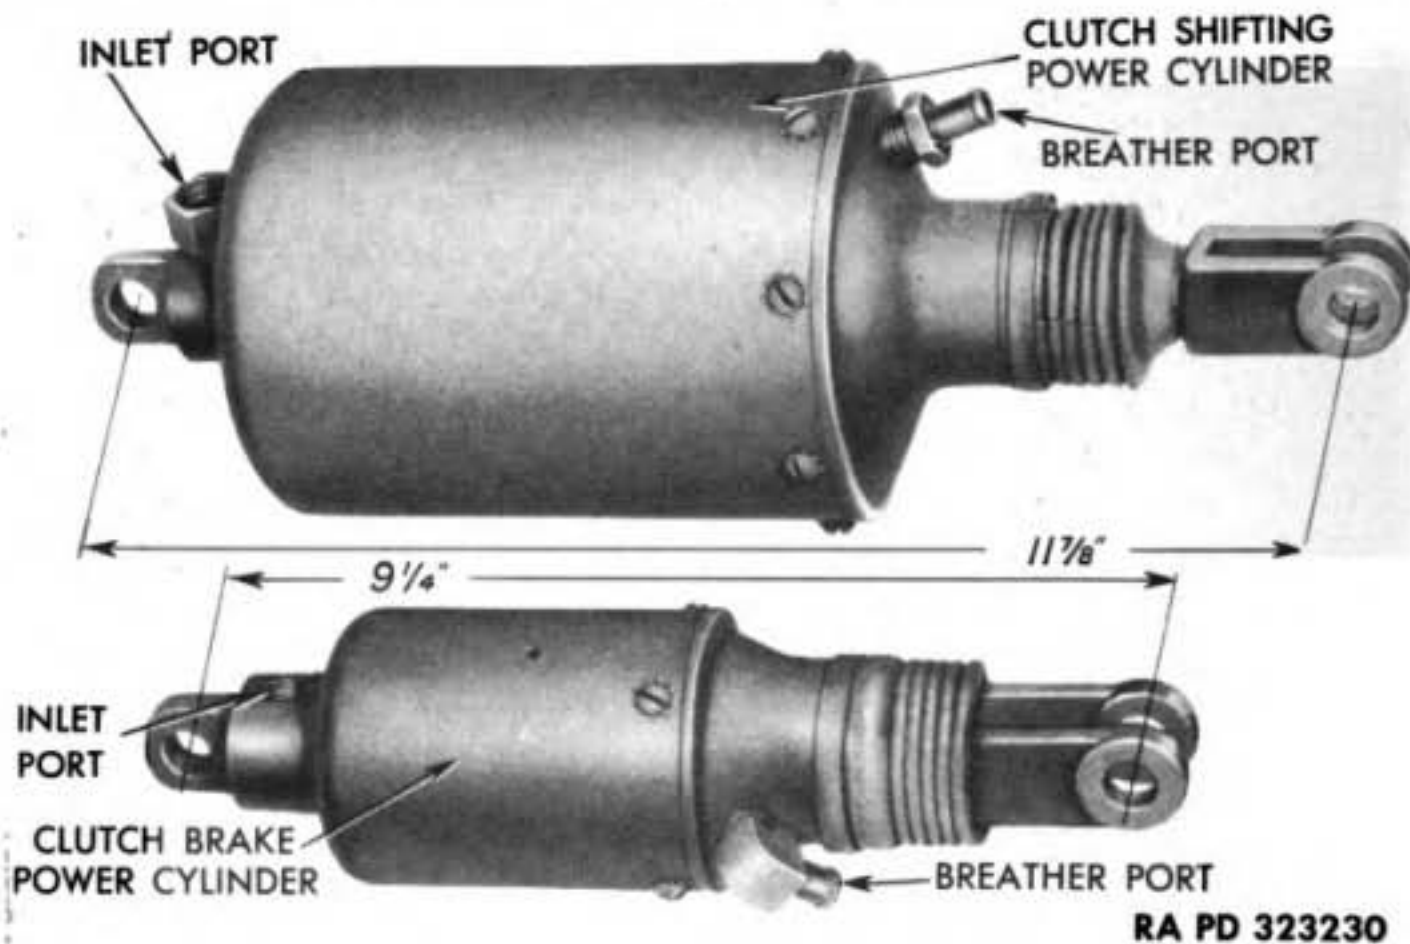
Clutch Shifting and Clutch Brake Power Cylinder
